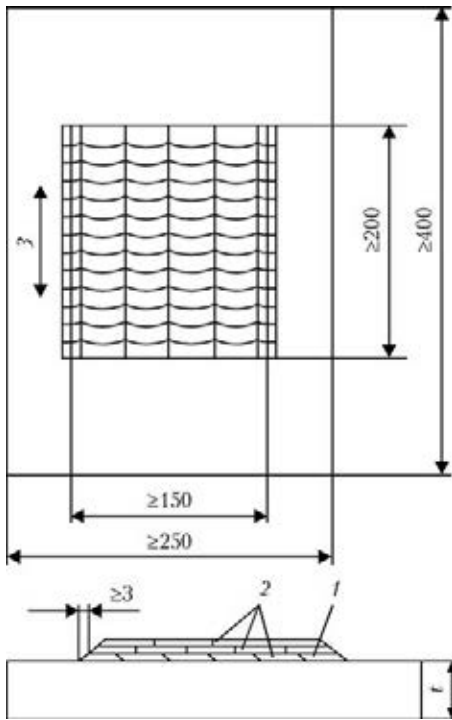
Surfaced test specimen (plate): 1 – buffer layer (sublayer, deposited when necessary); 2 – numbers of layers according to pWPS or total thickness of deposited layer; 3 – direction of surfacing; *t* – thickness of base metal [1]
